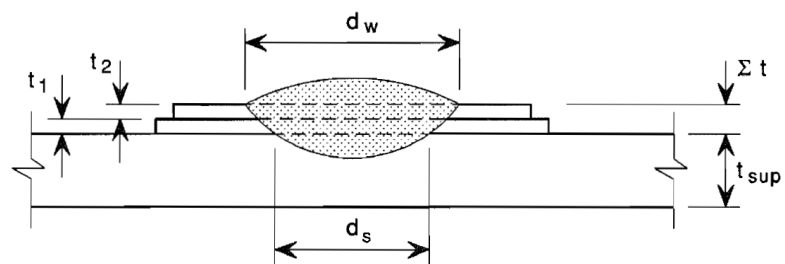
Arc spot weld with weld washer [8].
